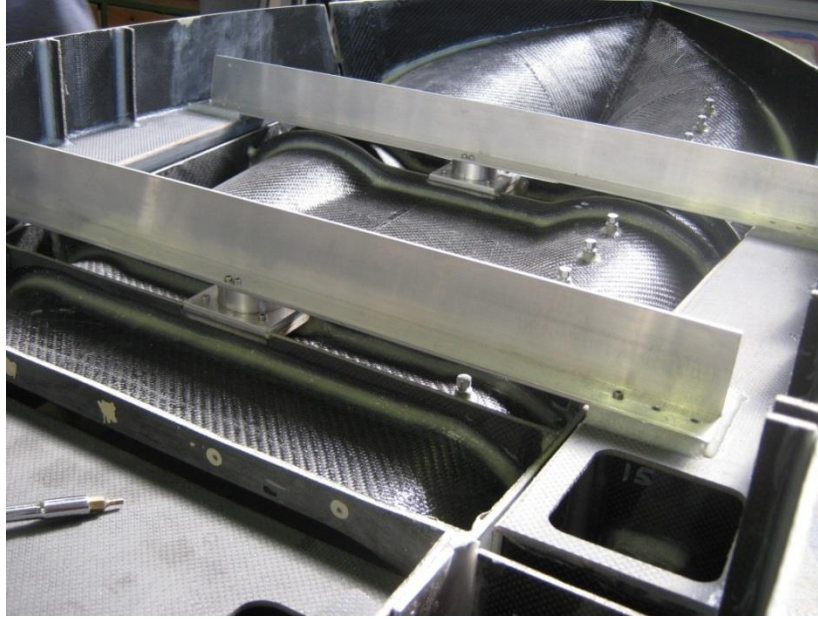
Centrebow segment transverse beam arrangement and 6DOF sensors. A stiffened carbon-fibre sandwich deck provides the base support for the beams
